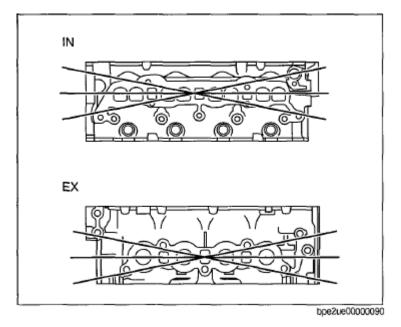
Measuring Contact Surface Of Exhaust And Intake Manifold For Distortion Using Straight Edge And Feeler Gauge
